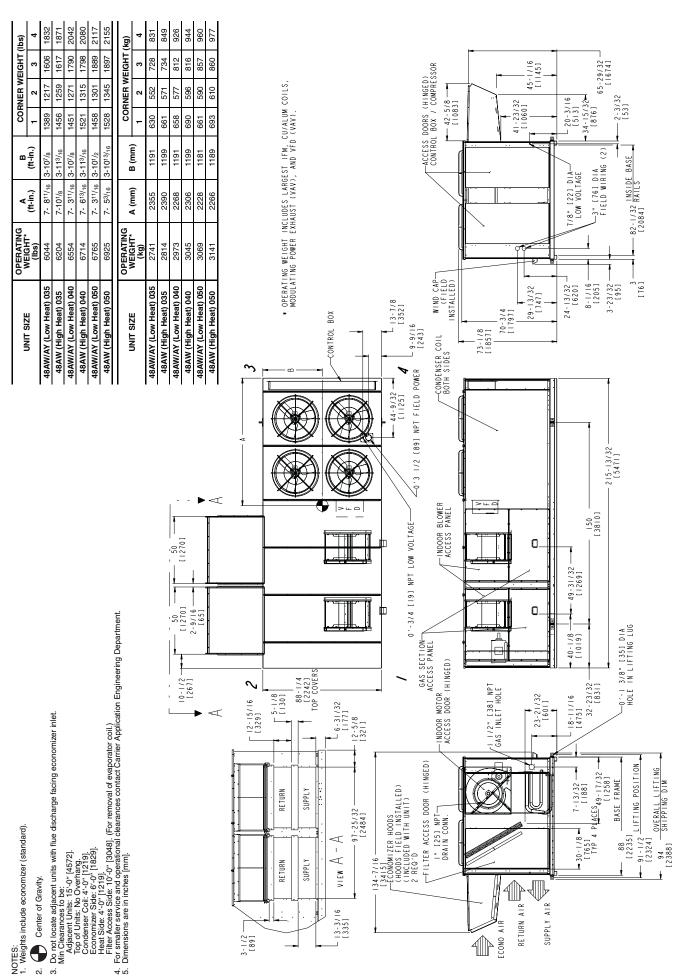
Base Unit Dimensions — 48AW,AY035-050
